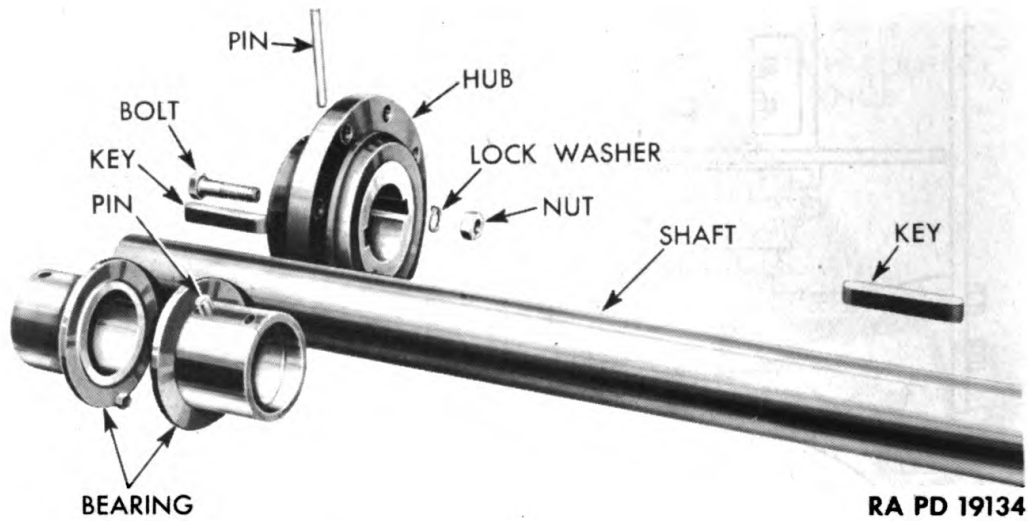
Winch Drum Shaft and Worm Gear Hub — Disassembled
